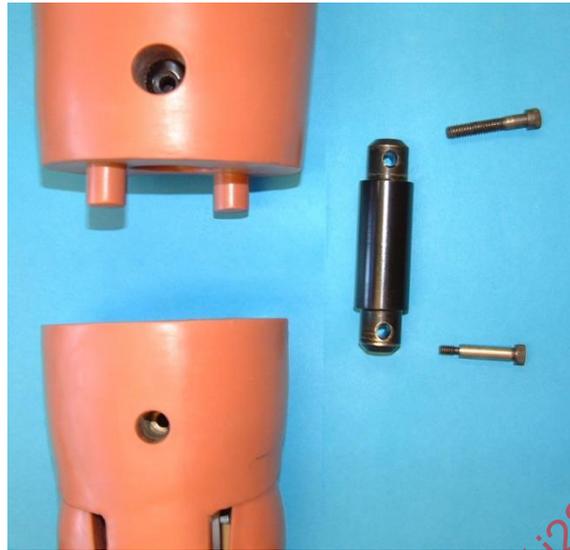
Shoulder bolt connects thigh to the femur component
